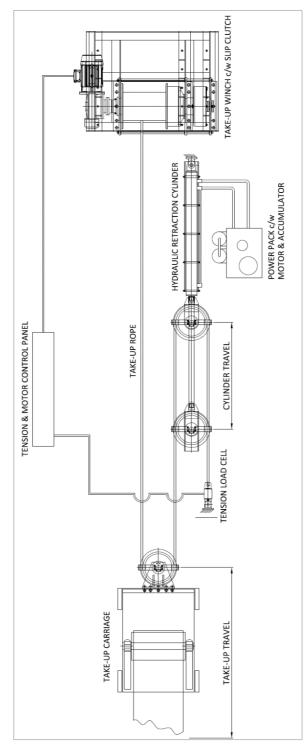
Typical conveyor take-up winch system with VFD, clutch and cylinder
